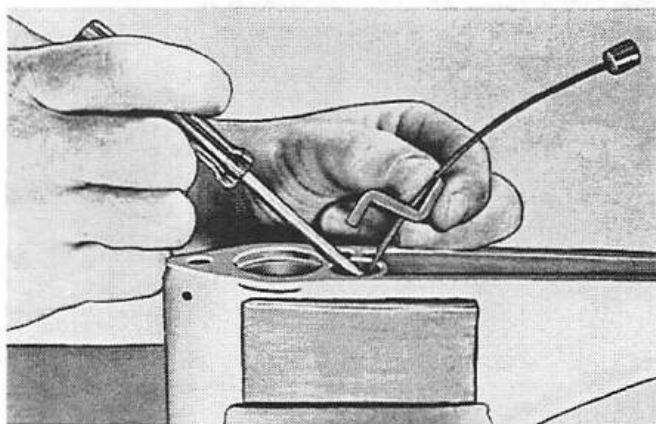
Installing Shift Linkage Assembly in Trip Finger Chamber
